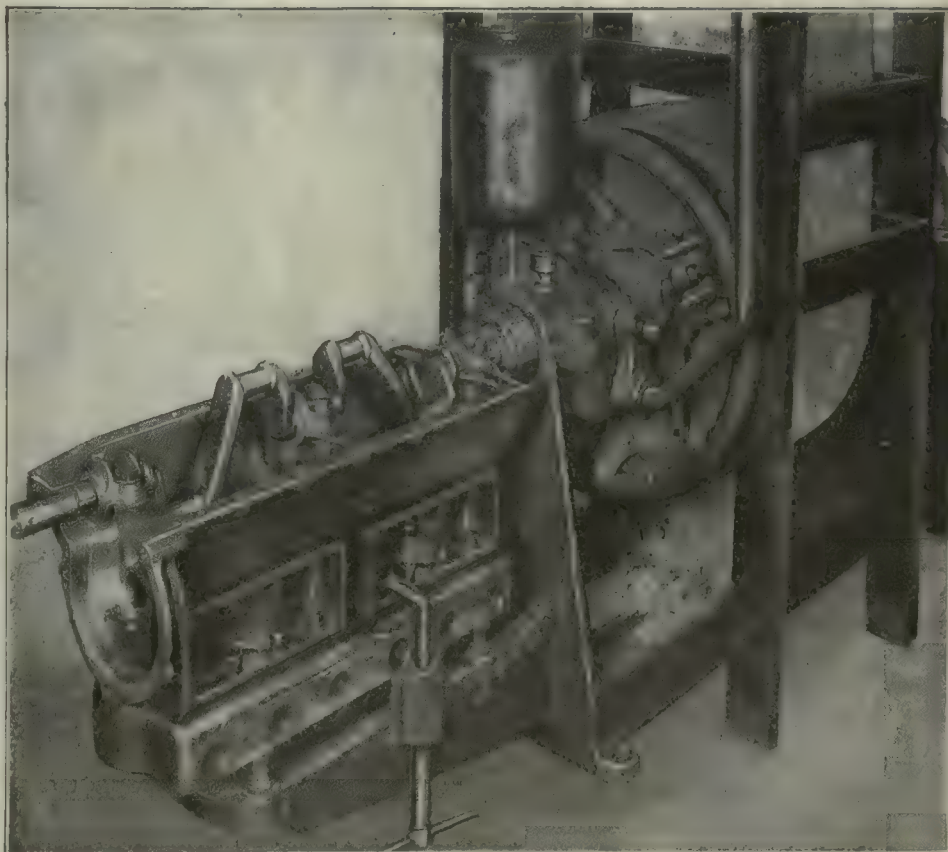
BURNING-IN THE CRANKSHAFT BEARINGS
